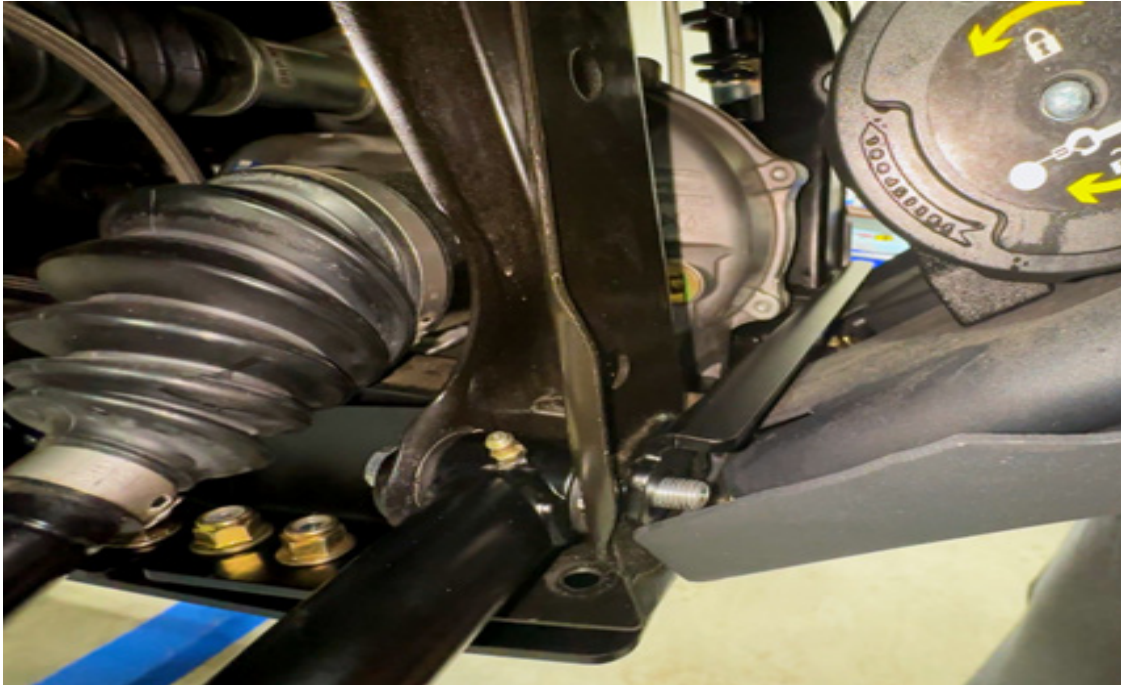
Install Front Support using a 15mm Socket and 15mm Wrench
